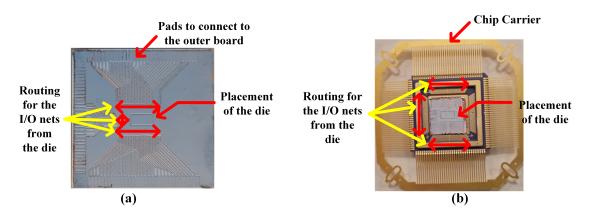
Patterned Board after Al deposition (a) on the inner board and (b) inside the chip carrier
